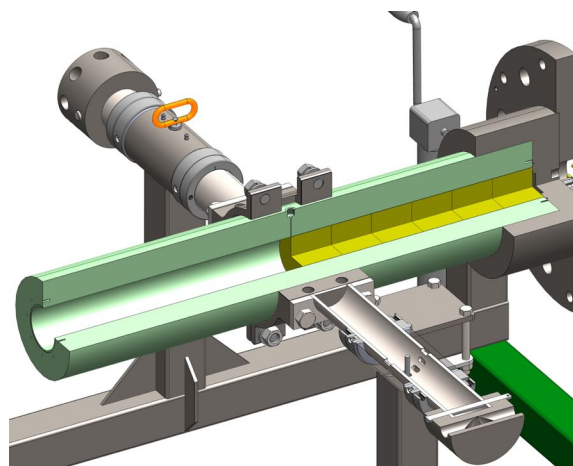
Cross-section view of horizontal tube half-filled with pellets.
